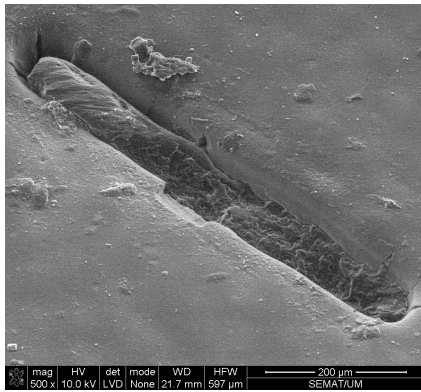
Detail (1) view of filled cavity wall on the low-relief SE logo
